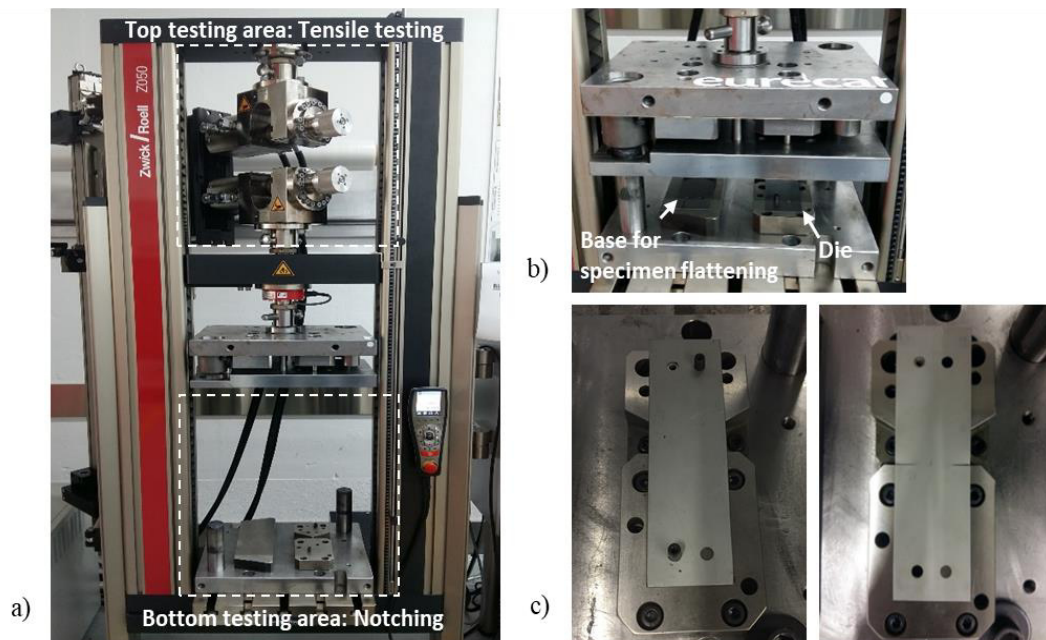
Images of the experimental setup for the notching process. a) Setup of the tool in the testing machine. b) Detail of the cutting tool. c) Specimen before (left) and after (right) the notching process.
